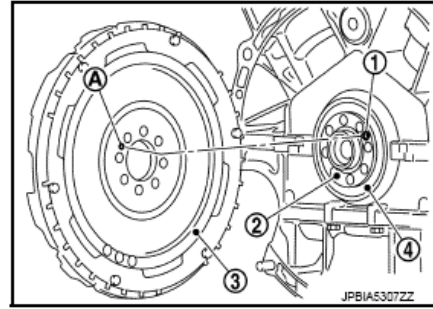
Locating Crankshaft, Dowel Pin, Hole, Flywheel And Rear Oil Seal
